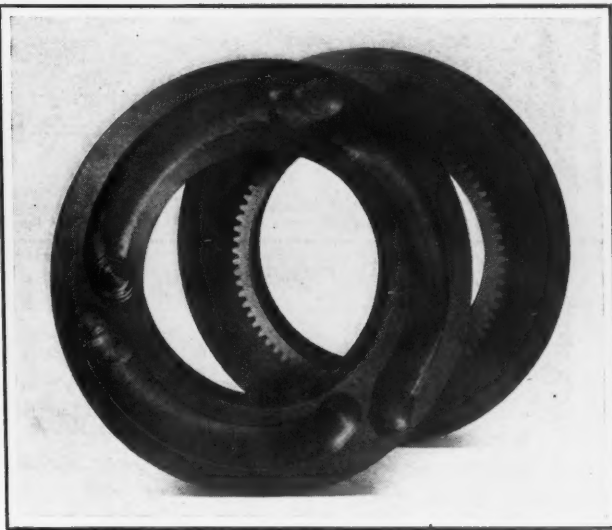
Cams in which Grooves are milled by Cutters shown in Fig. 1
